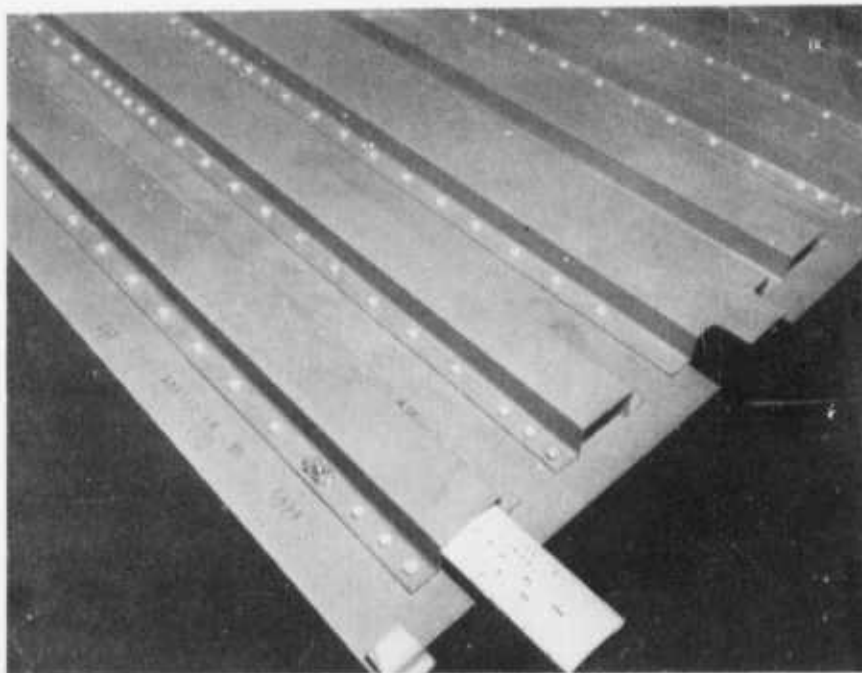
C-130 CARGO FLOOR SECTION FABRICATED
